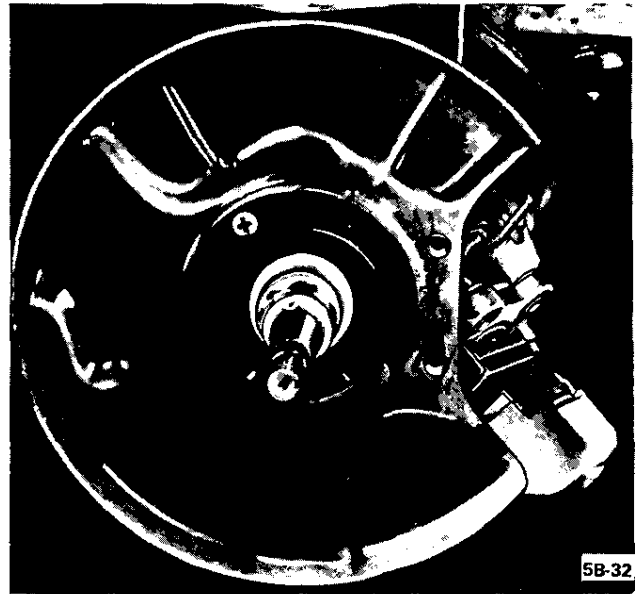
B-32 Brake Disc Shield Attached to Steering Knuckle
